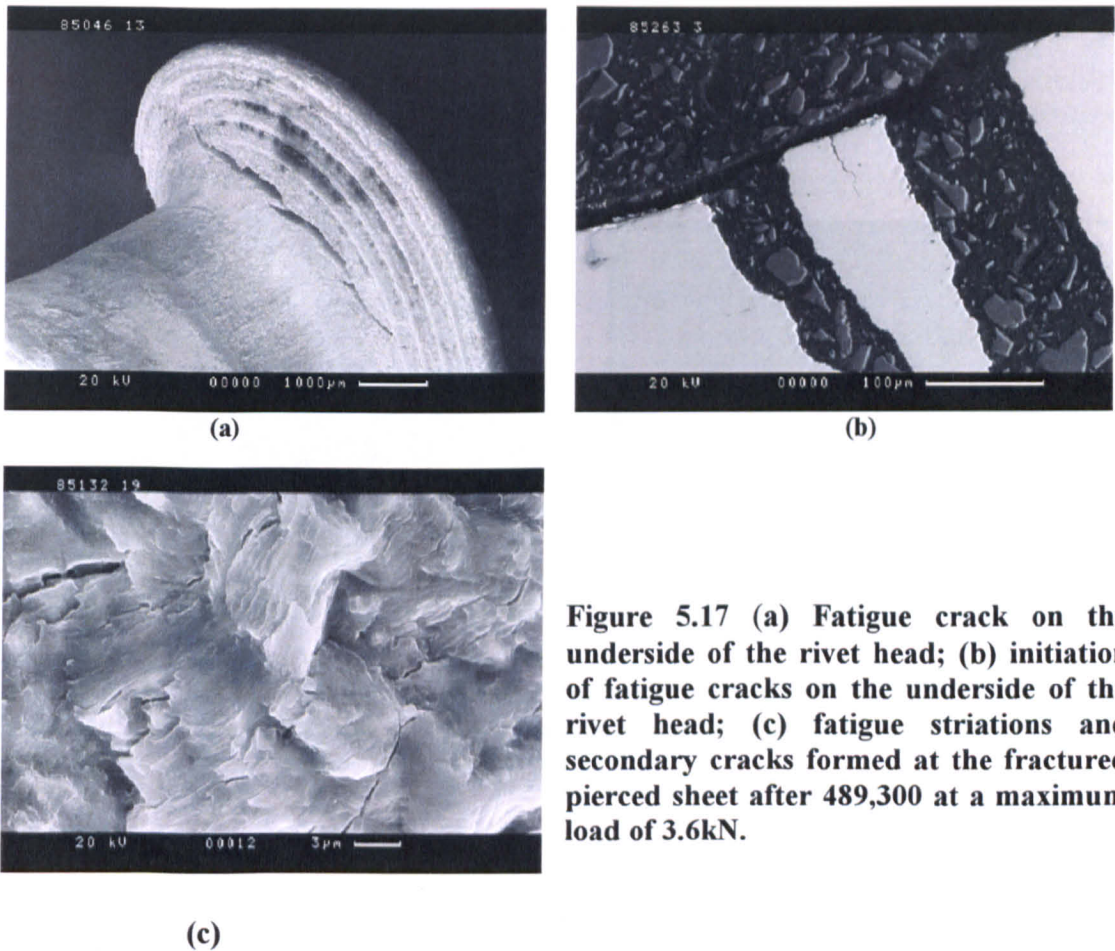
(a) Fatigue crack on the underside of the rivet head; (b) initiation of fatigue cracks on the underside of the rivet head; (c) fatigue striations and secondary cracks formed at the fractured pierced sheet after 489,300 at a maximum load of 3.6kN.
